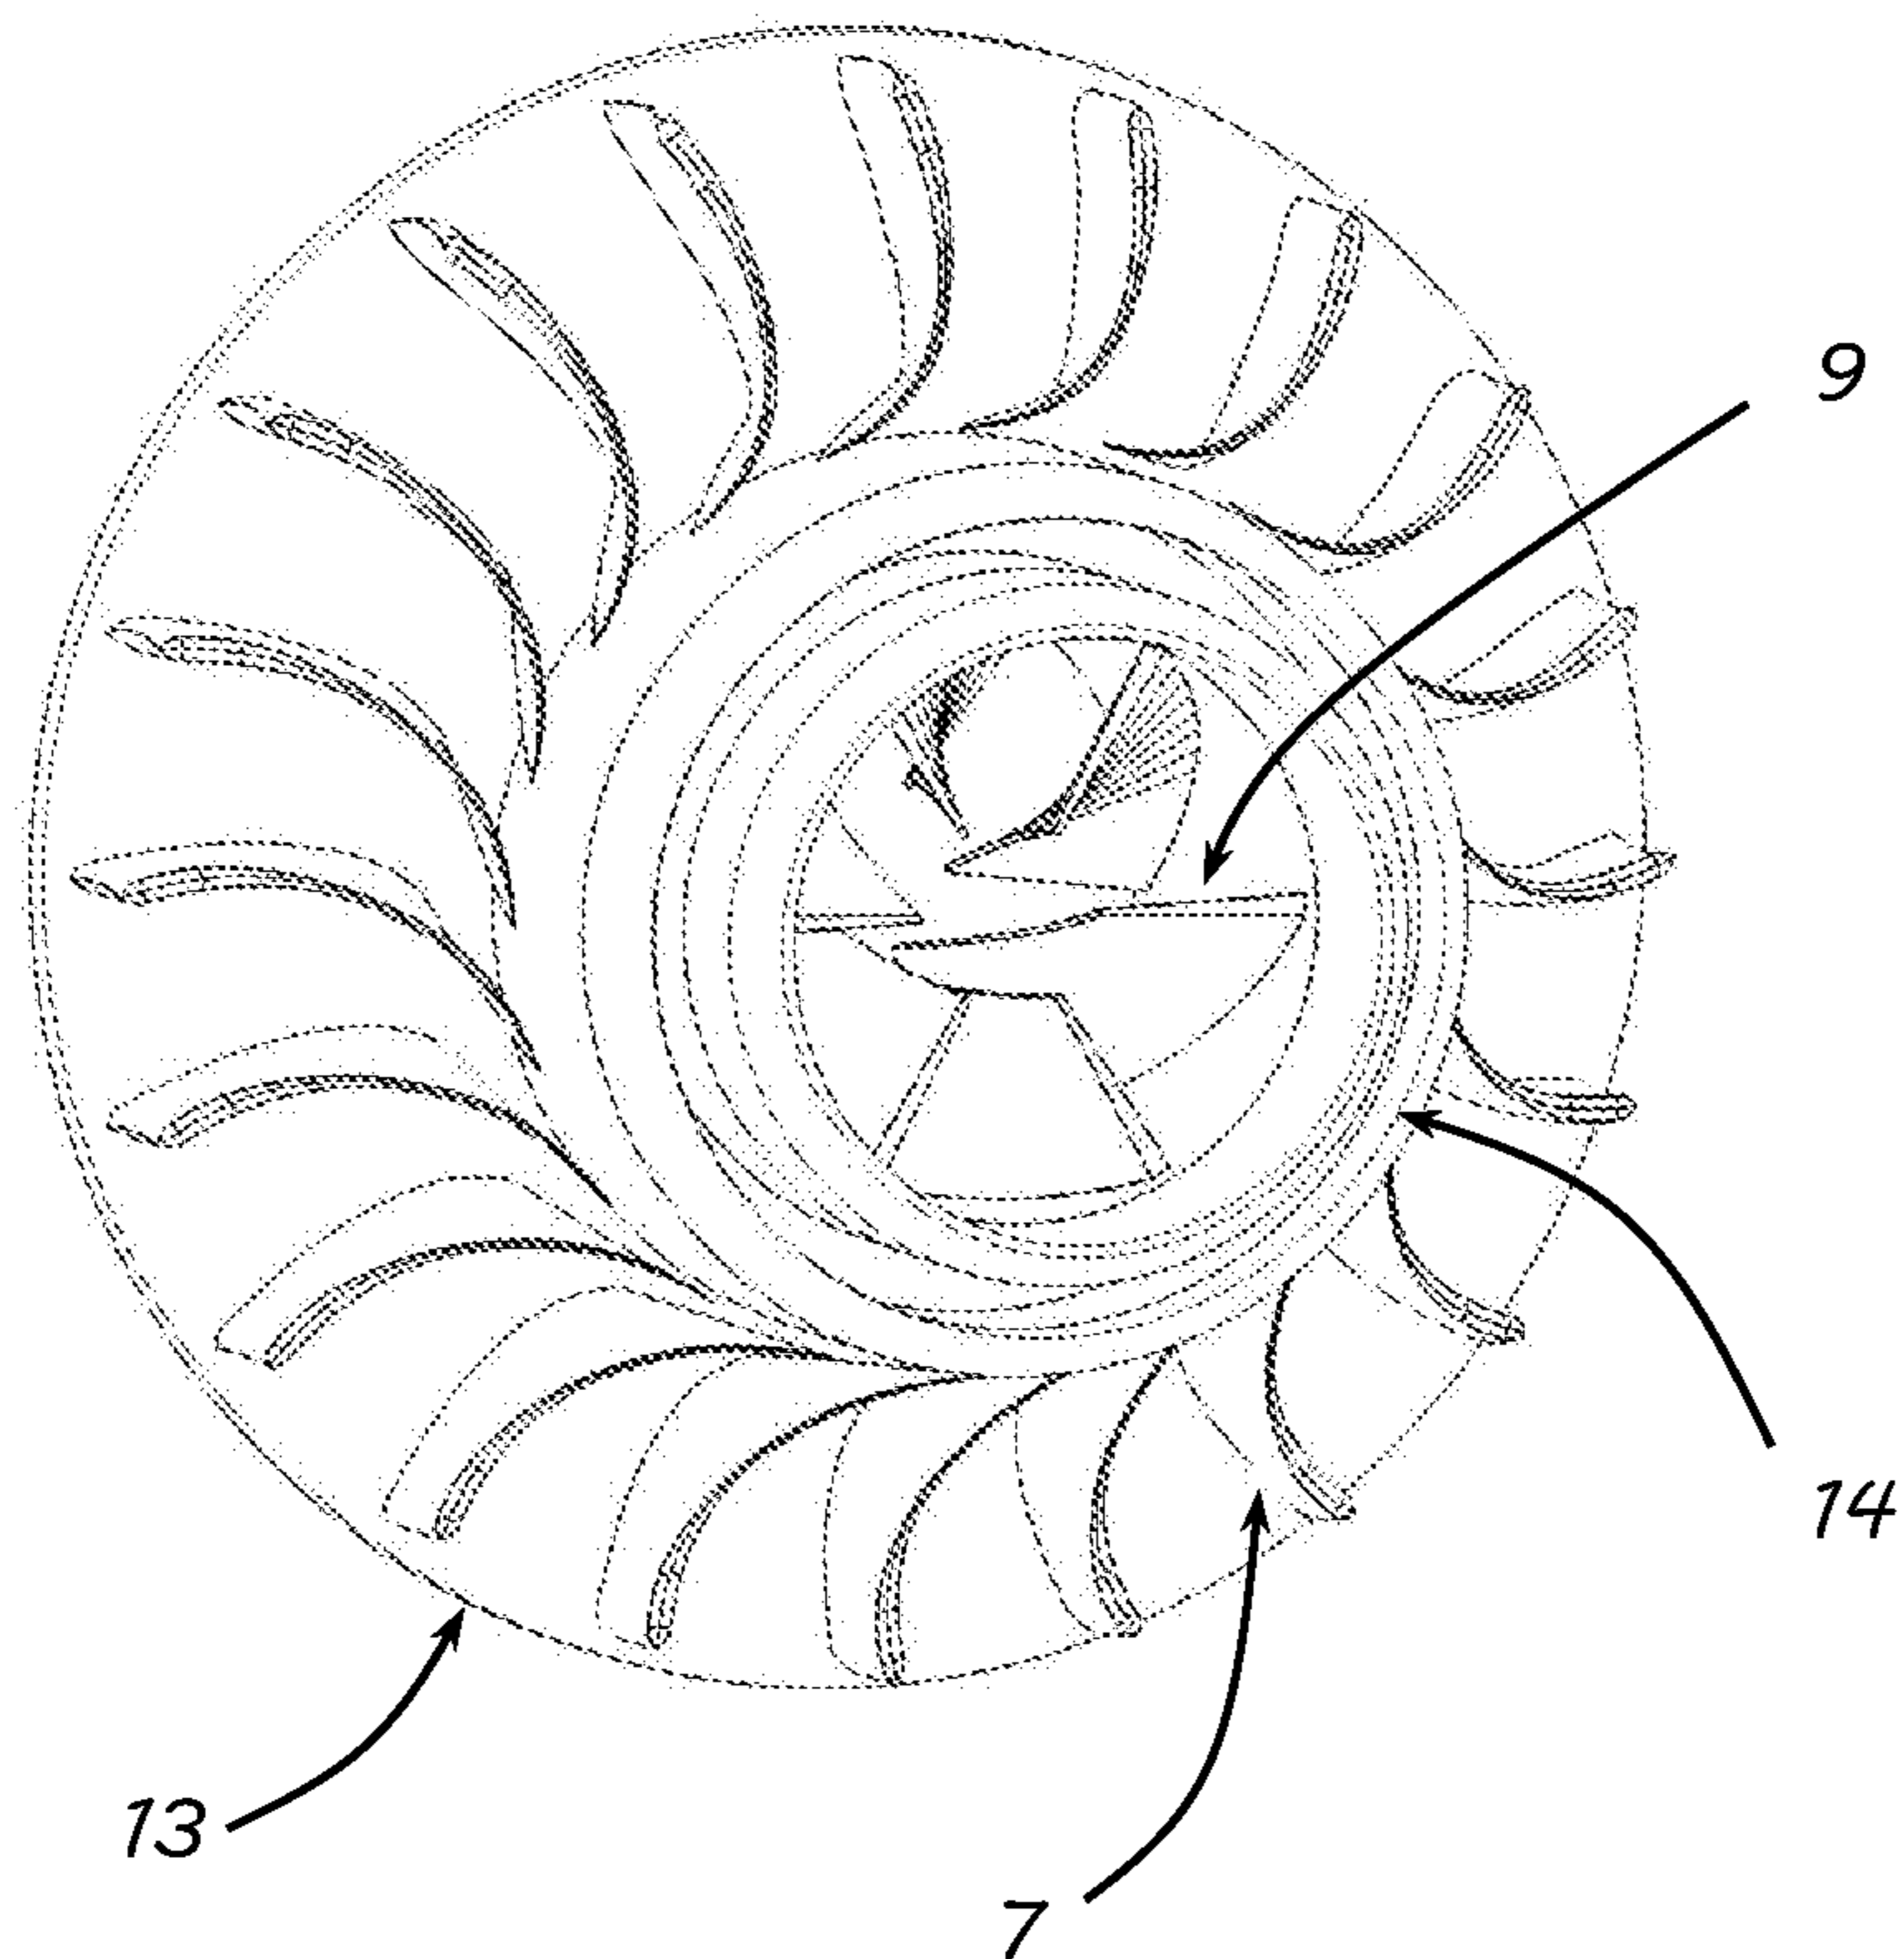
Perspective View of the Rotor Showing its External and Internal Blades
